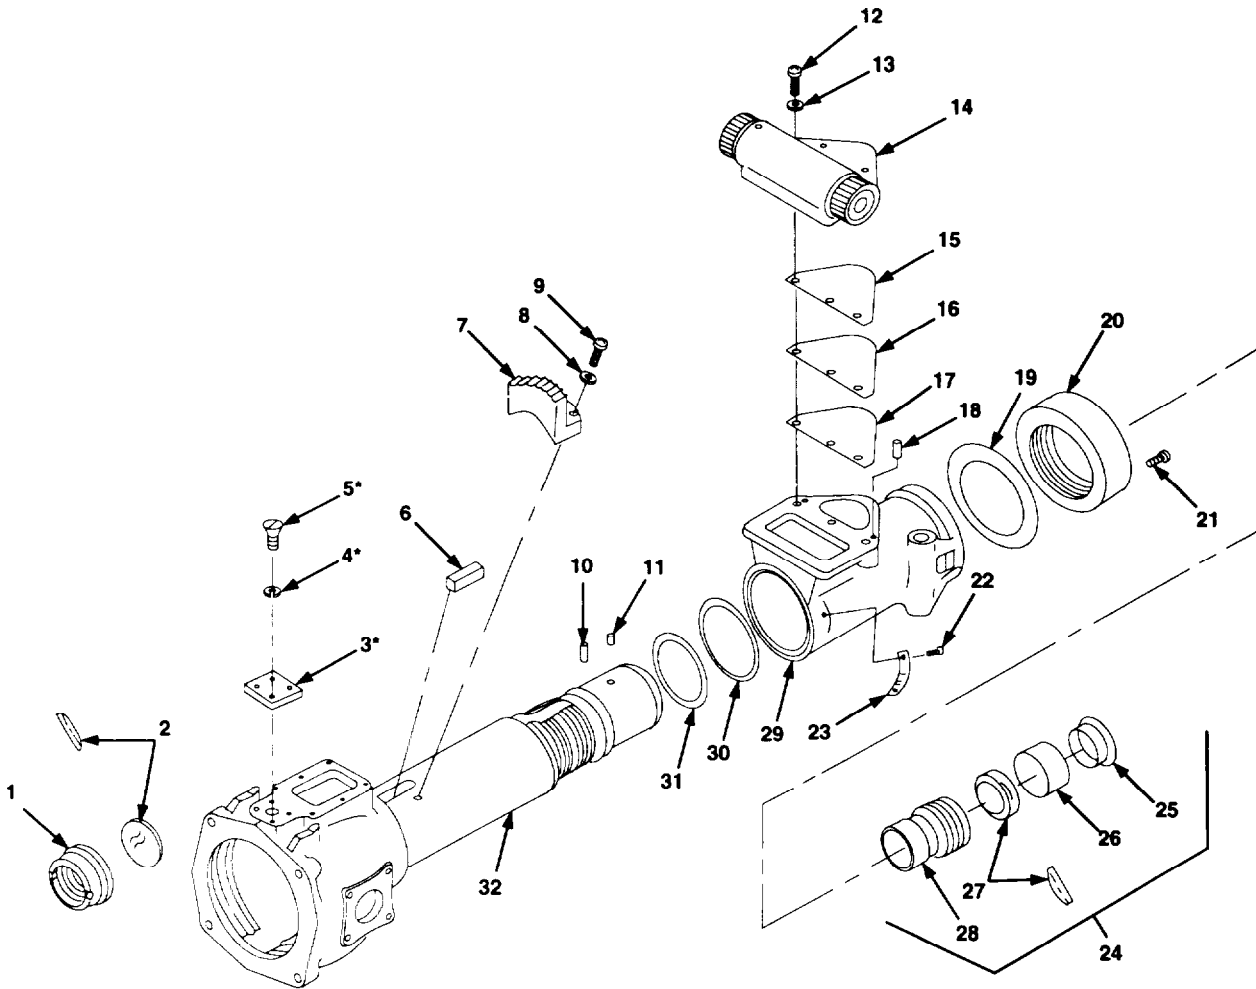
Elbow Telescope and Reticle Cage Assembly 11834882 and 9356016
